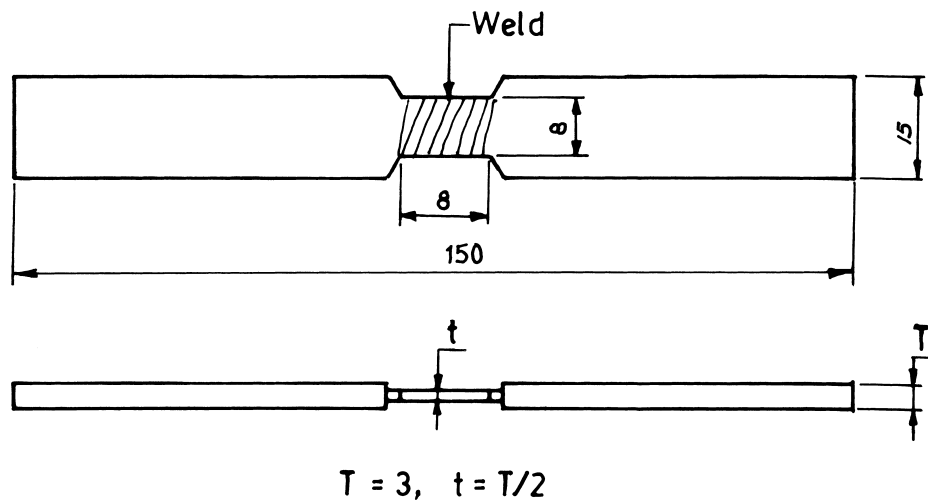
Geometry of the tensile specimens (dimensions: mm).
